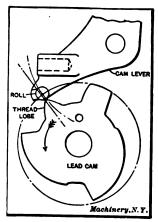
Position of Roll on Thread Lobe when Spindle is reversed
